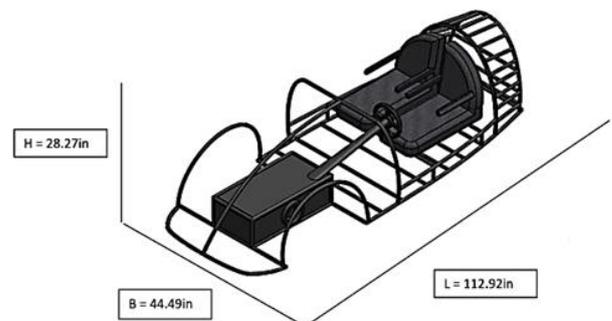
3D Model of Quad cycle Chassis with dimensions
